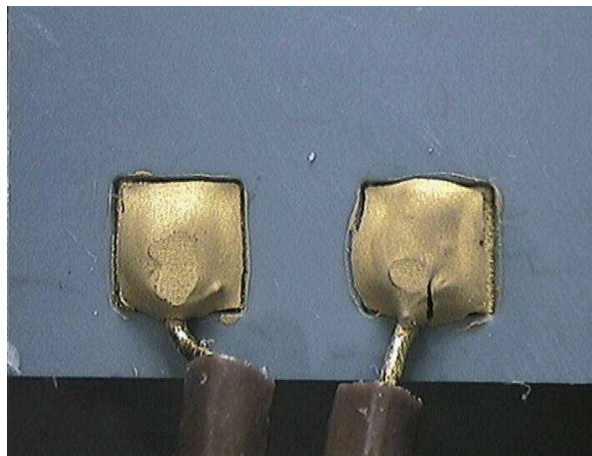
enlargement of the new welded connection to the pads carried out using both “vias” and “conductor paste”
